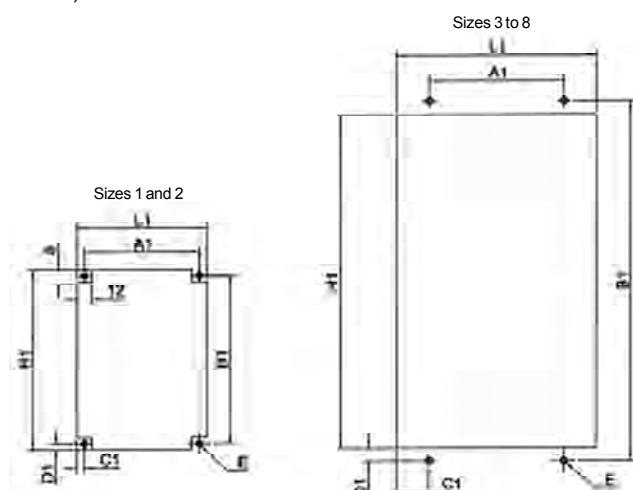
a) to c) - Mounting procedure for the CFW-09 with the heatsink through the mounting surface
